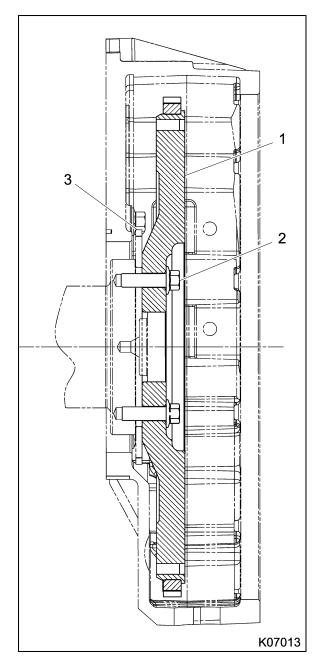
14 inch flywheel - for multiple plate clutch applications (800 lbf·ft and below)
